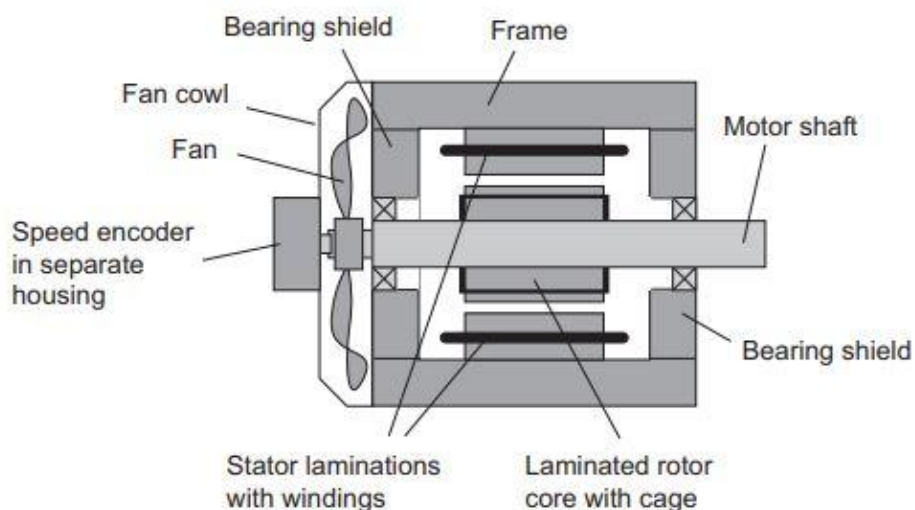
Design of an asynchronous motor [technicalbookspdf].
